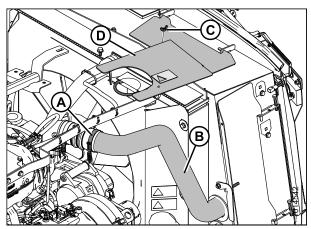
Charge Air Cooler Tube and Exhaust Shroud (Exhaust Stack Removed for Clarity)
